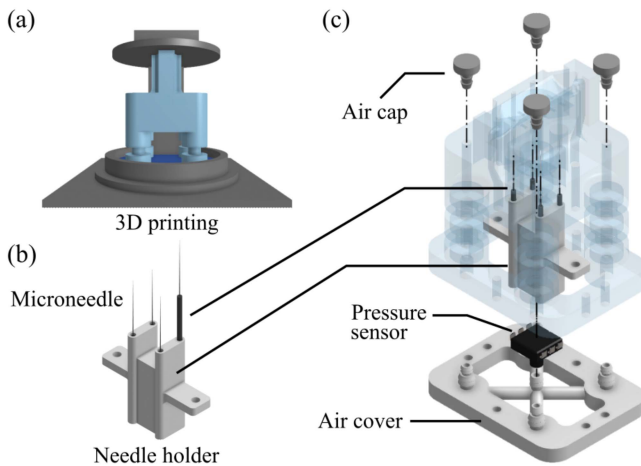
Fabrication process. (a) 3D printing of the gripper body. (b) Microneedles and its holder. (c) Final assembly.
